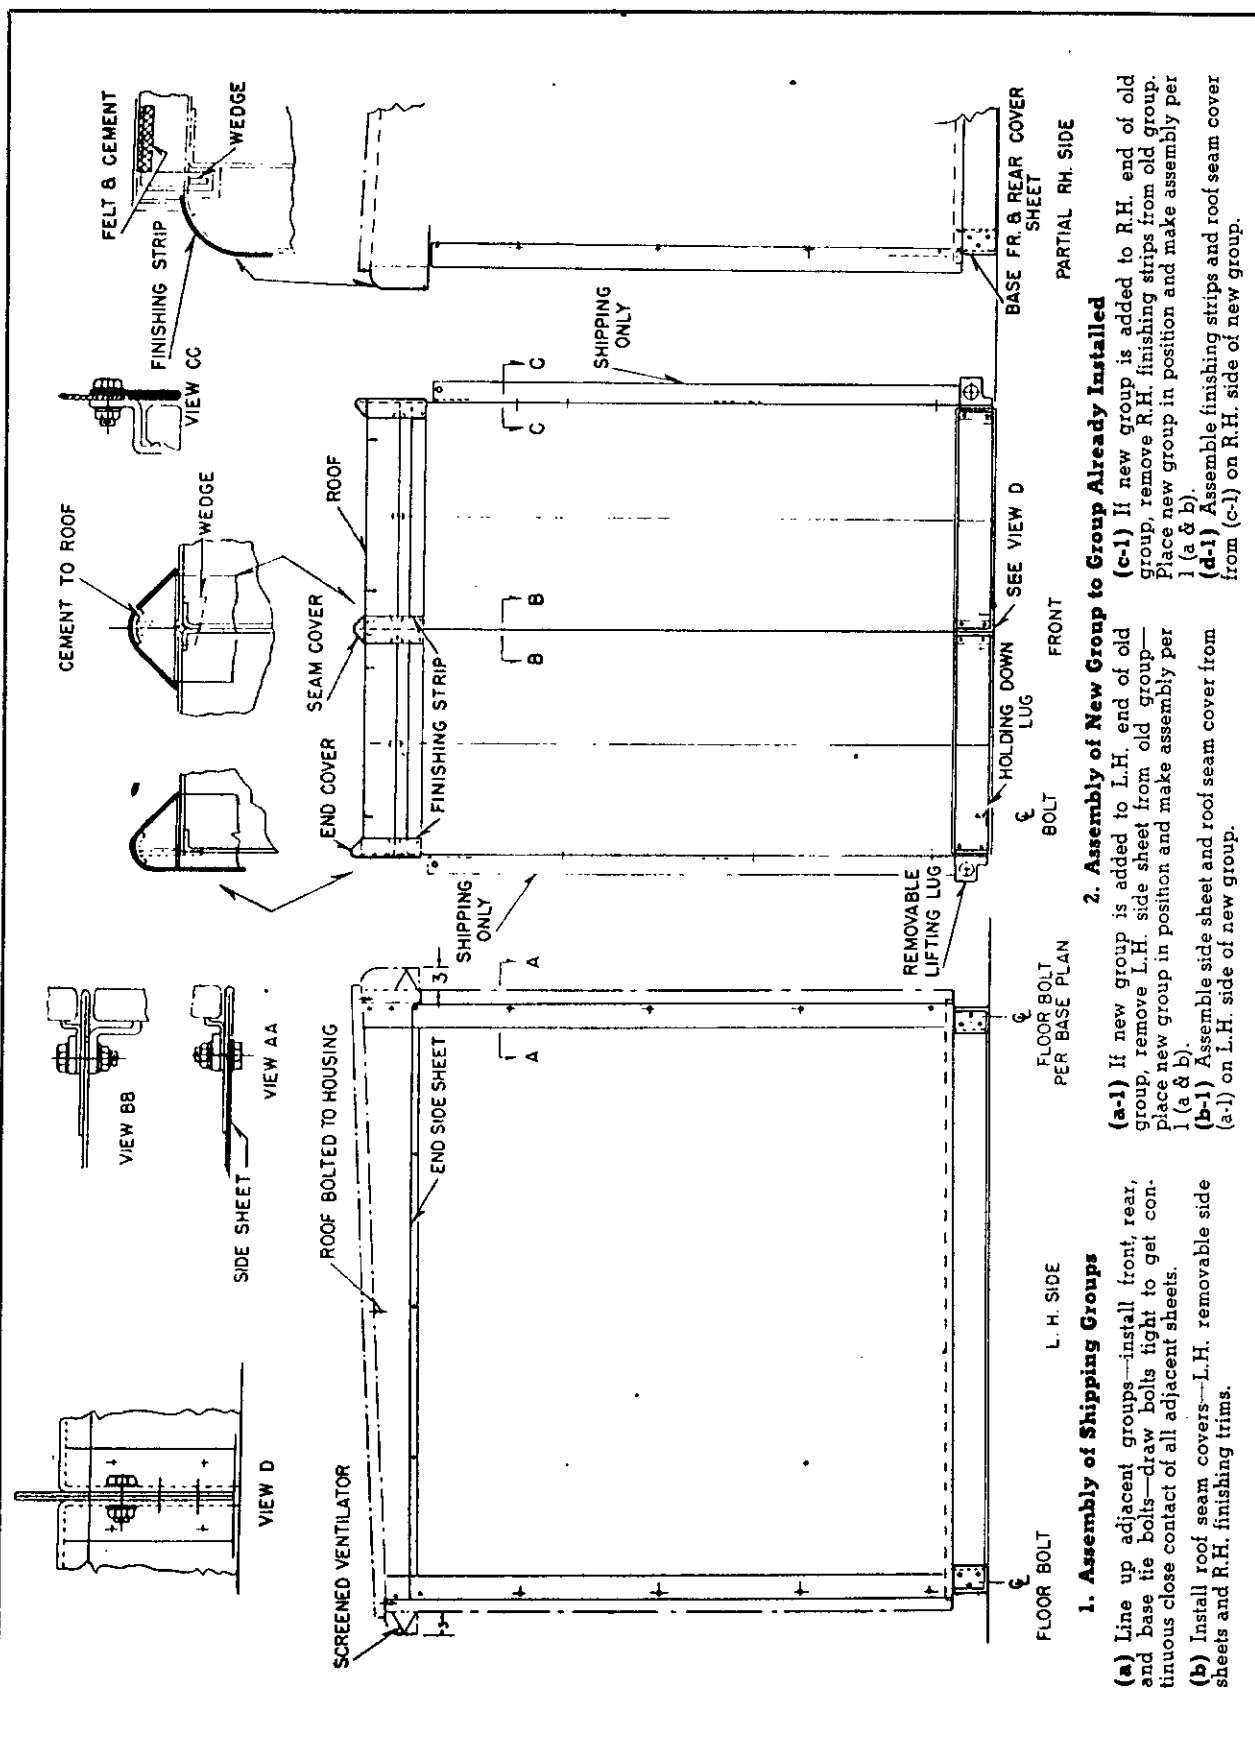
Shop and Field Assembly—Typical Outdoor Metal-Clad Switchgear
